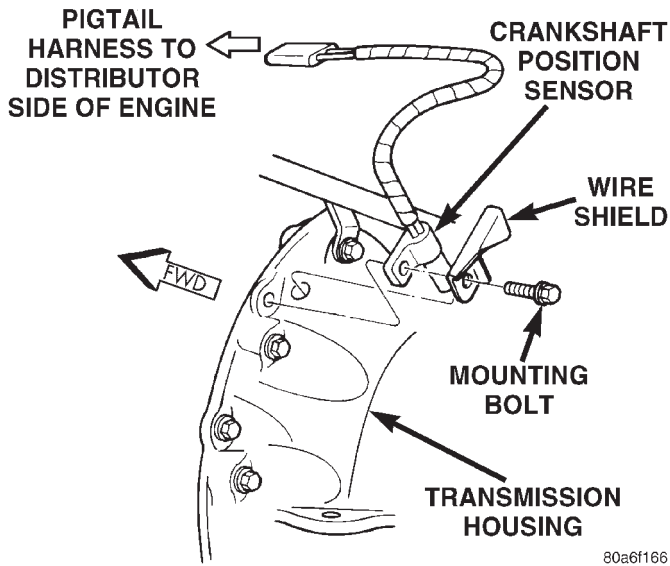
Crankshaft Position Sensor—4.0L 6-Cylinder Engine
